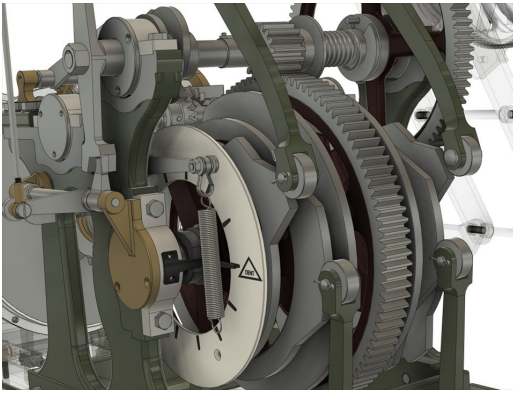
The cam plates and cam followers. Image Cumbria Clock Company.
